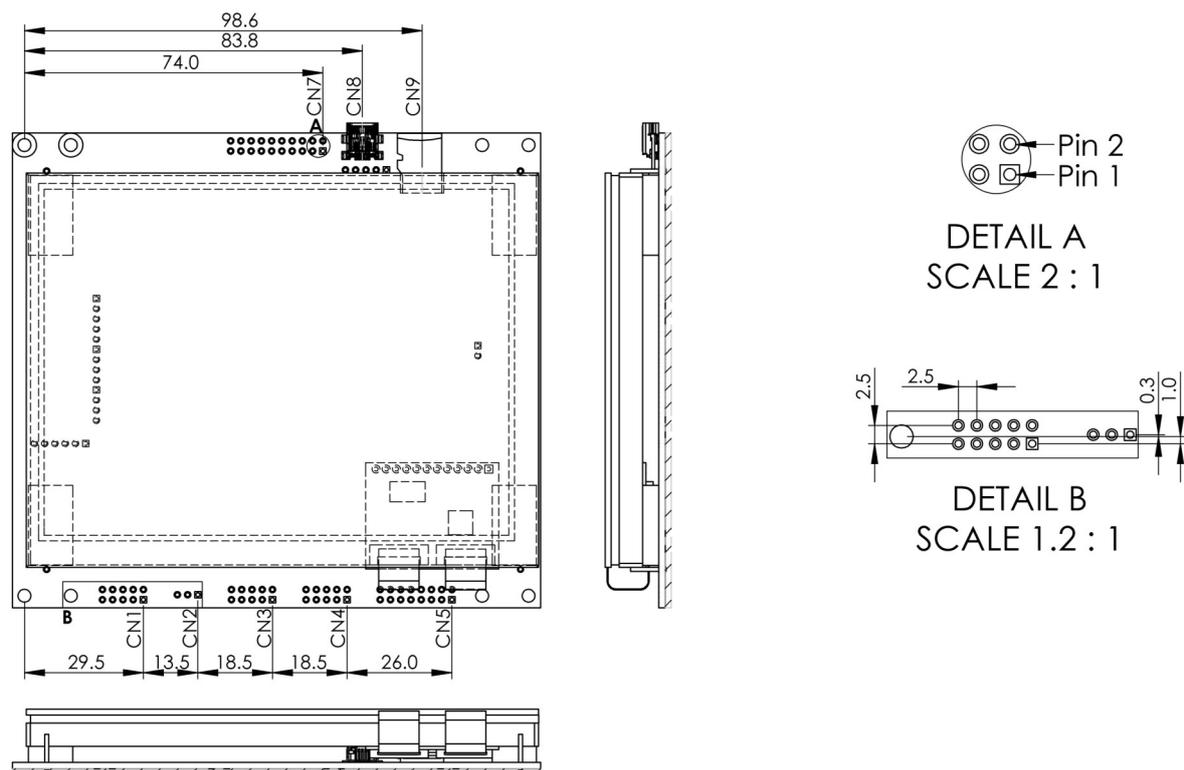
TU640x480C-K61XA1XX Connector Location drawing. Reference dimensions only.
